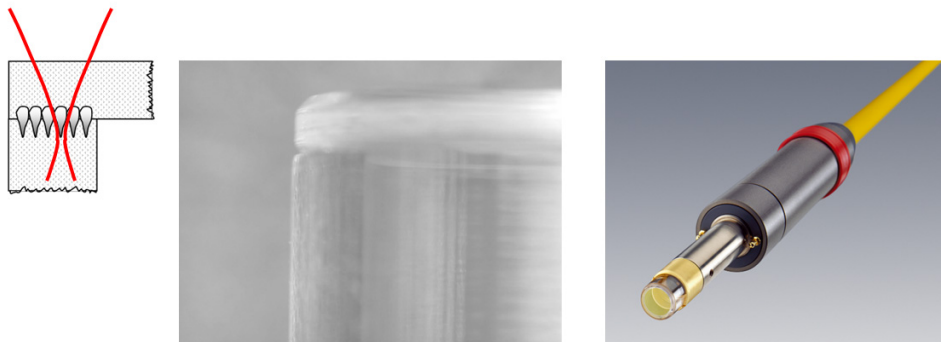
(a) welding joint with laser beam; (b) protective cap; (c) Laser light cable.
